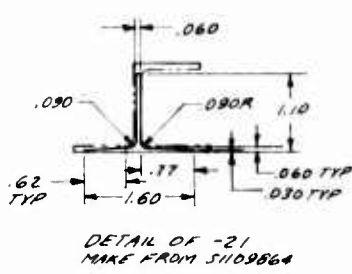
Beam Specimen Designs for Shaker Testing (Drawing SR-008002)
